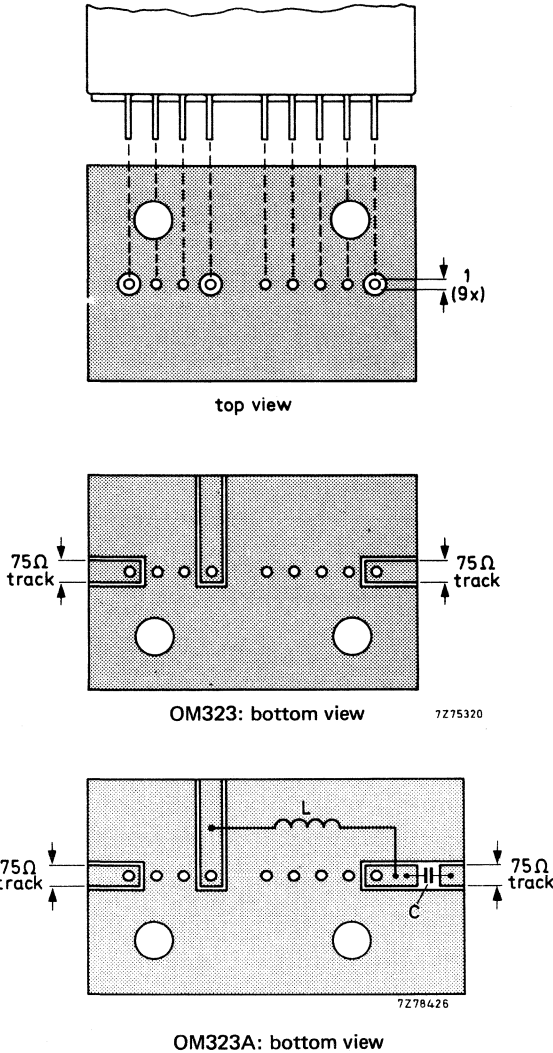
Printed-circuit board holes and tracks for the OM323 and OM323A.
